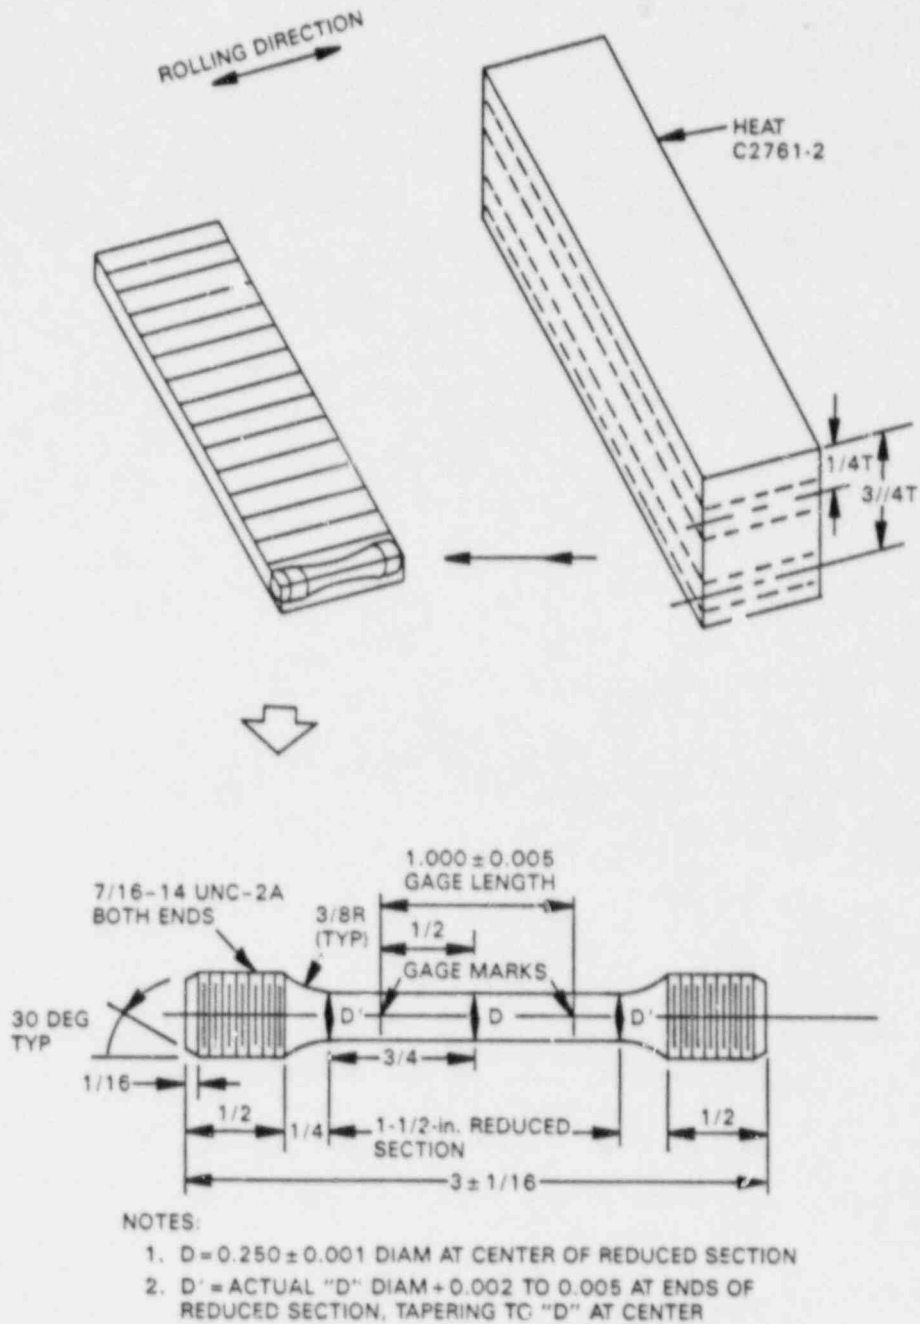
Fabrication Method for Base Metal Tensile Specimens
